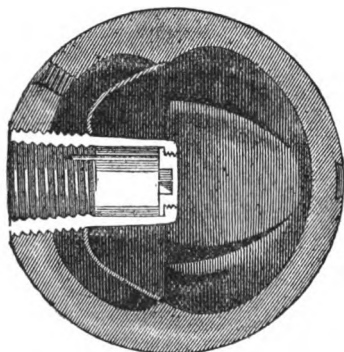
SECTION OF DIAPHRAGM SHRAPNEL SHELL, WITHOUT BULLETS.
